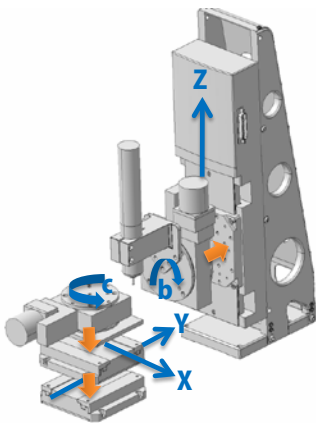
Configuration of a 5-axis machine tool (RTTTR type)
